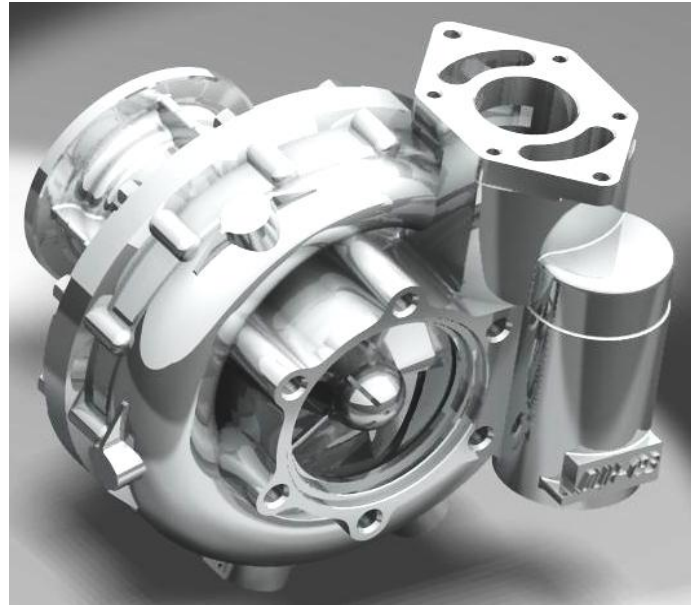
Assembly of a centrifugal pump casing in a CAD system
